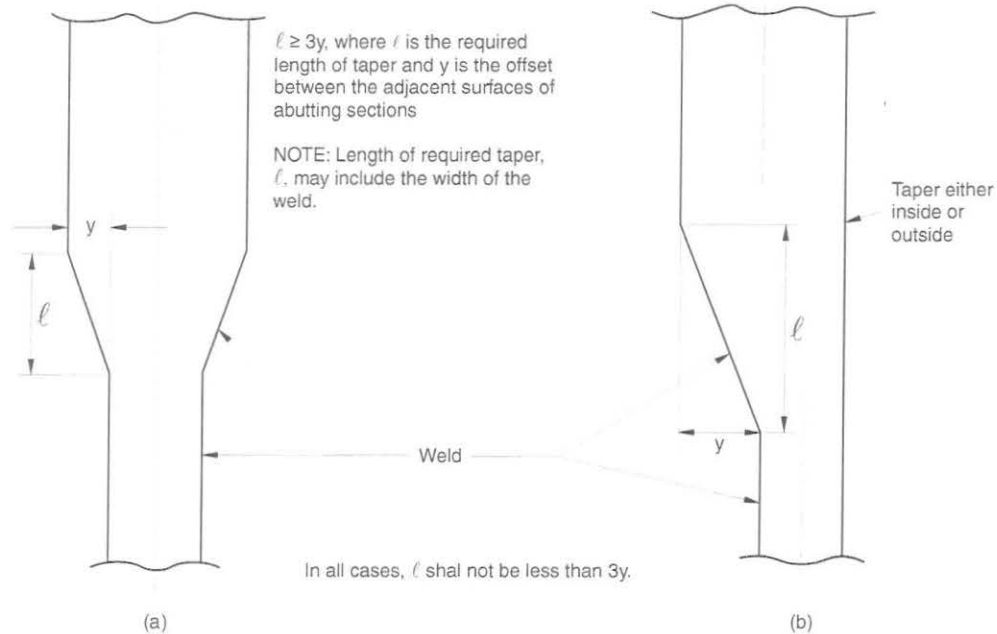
Butt-Welding of Plates of Unequal Thickness (Fig. UW-9 from ASME VIII-1)
